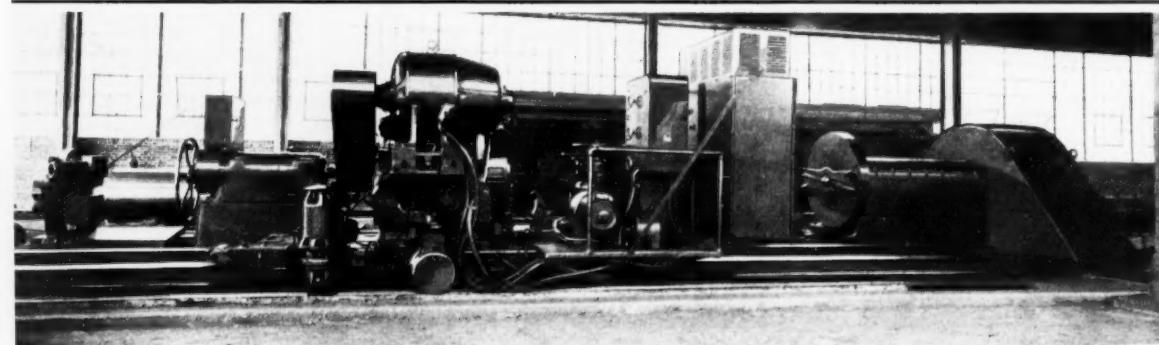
Rear View of Roll-grinder Shown in Fig. 1
